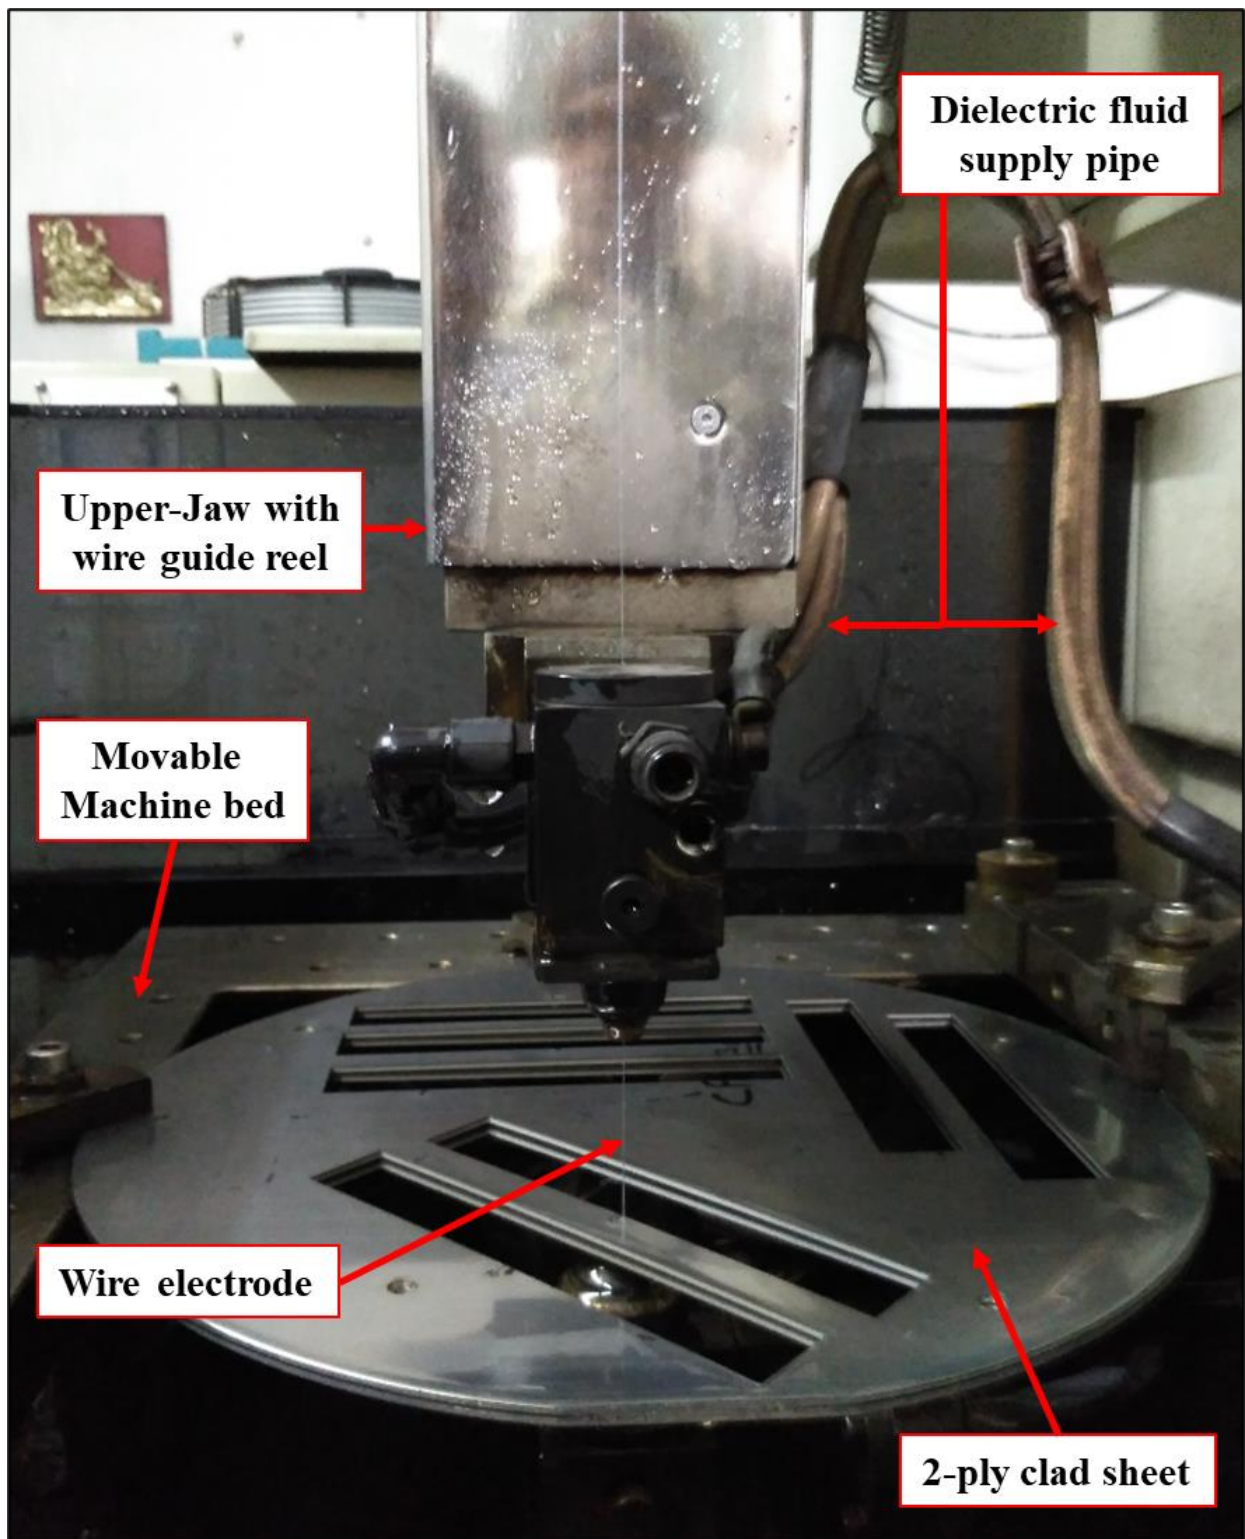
Cutting of bending samples on CNC Wire-Cut EDM Machine
